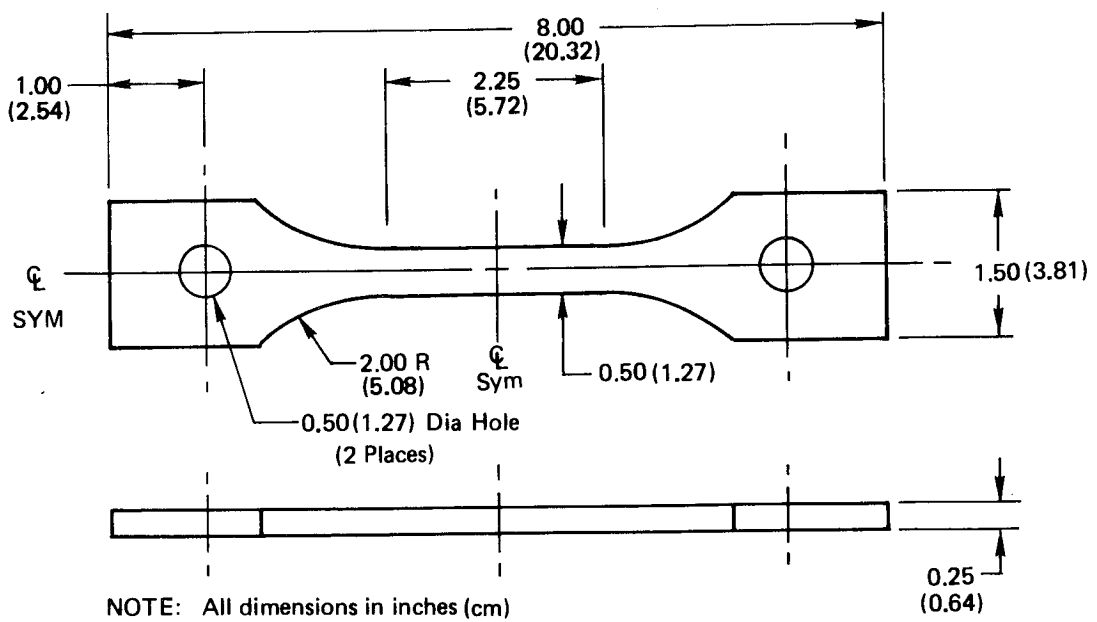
Mechanical Property Test Specimen for 304 Stainless Steel
